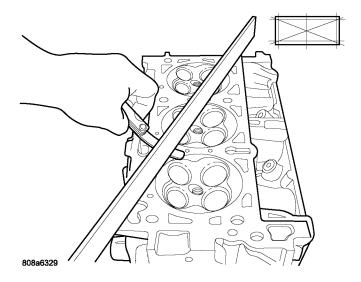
Checking Cylinder Head Flatness—Typical INSTALLATION - CYLINDER HEAD
